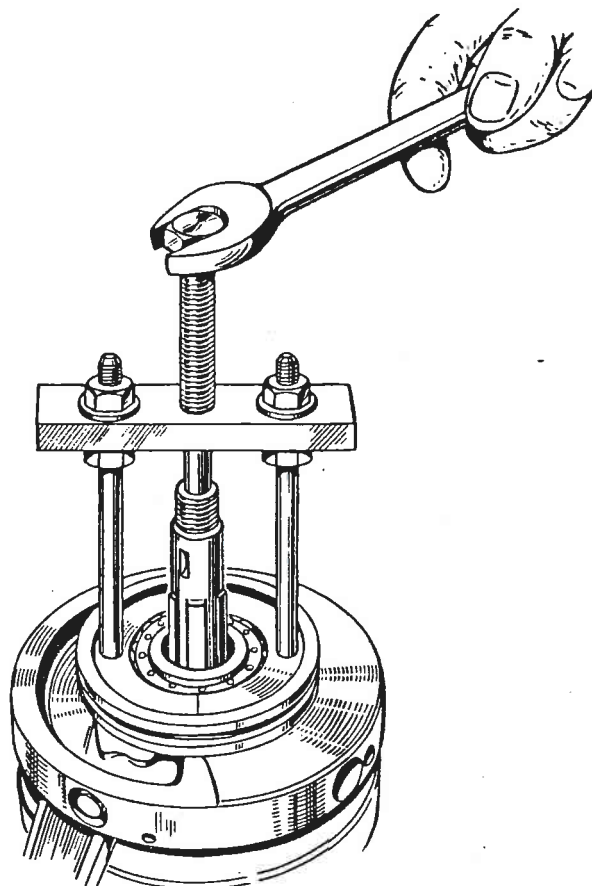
Using tool No. T18 to remove the roller bearing inner race
